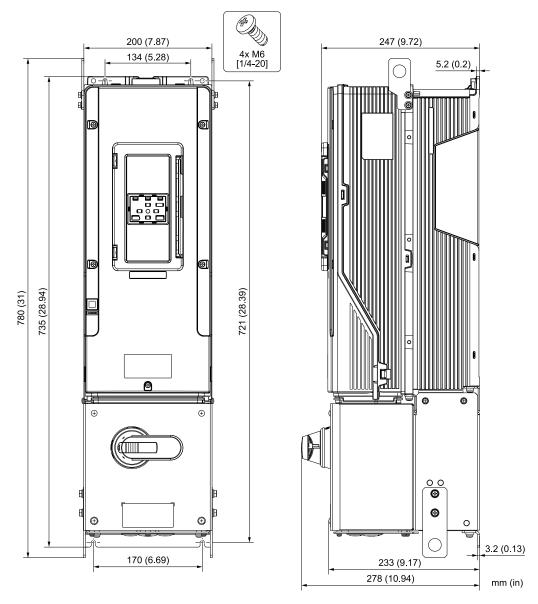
Exterior and Mounting Dimensions Diagram 3
